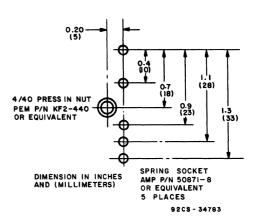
Dimensions of MSIM 20 module mounting positions.
